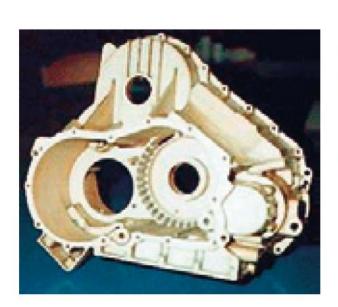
Layer laminate manufacturing, paper lamination, gear housings (LOM)
